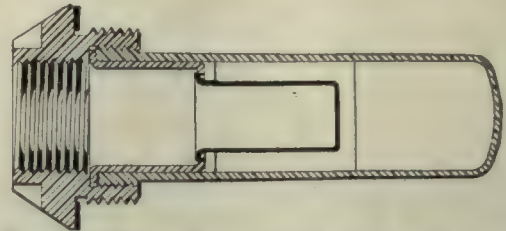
ASSEMBLY OF ADAPTER, BOOSTER CASE, FUSE SOCKET AND HOLDER
